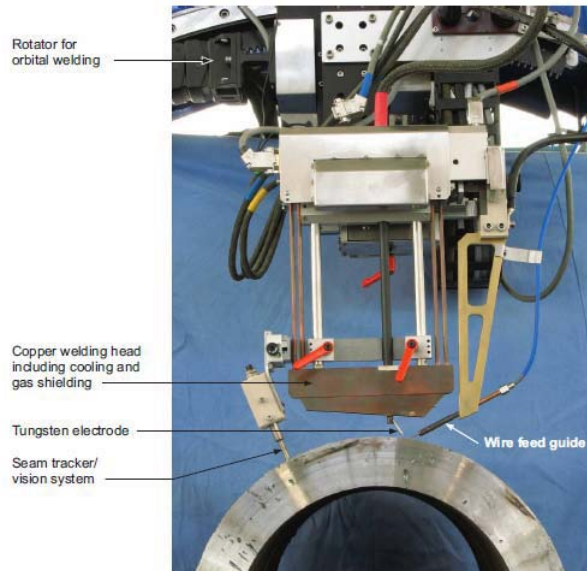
Typical Narrow-gap GTAW welding with an orbital torch.
